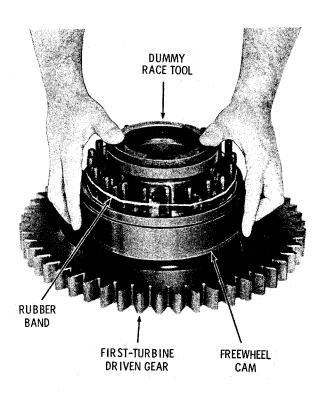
Installing assembled cam onto first turbine driven gear
